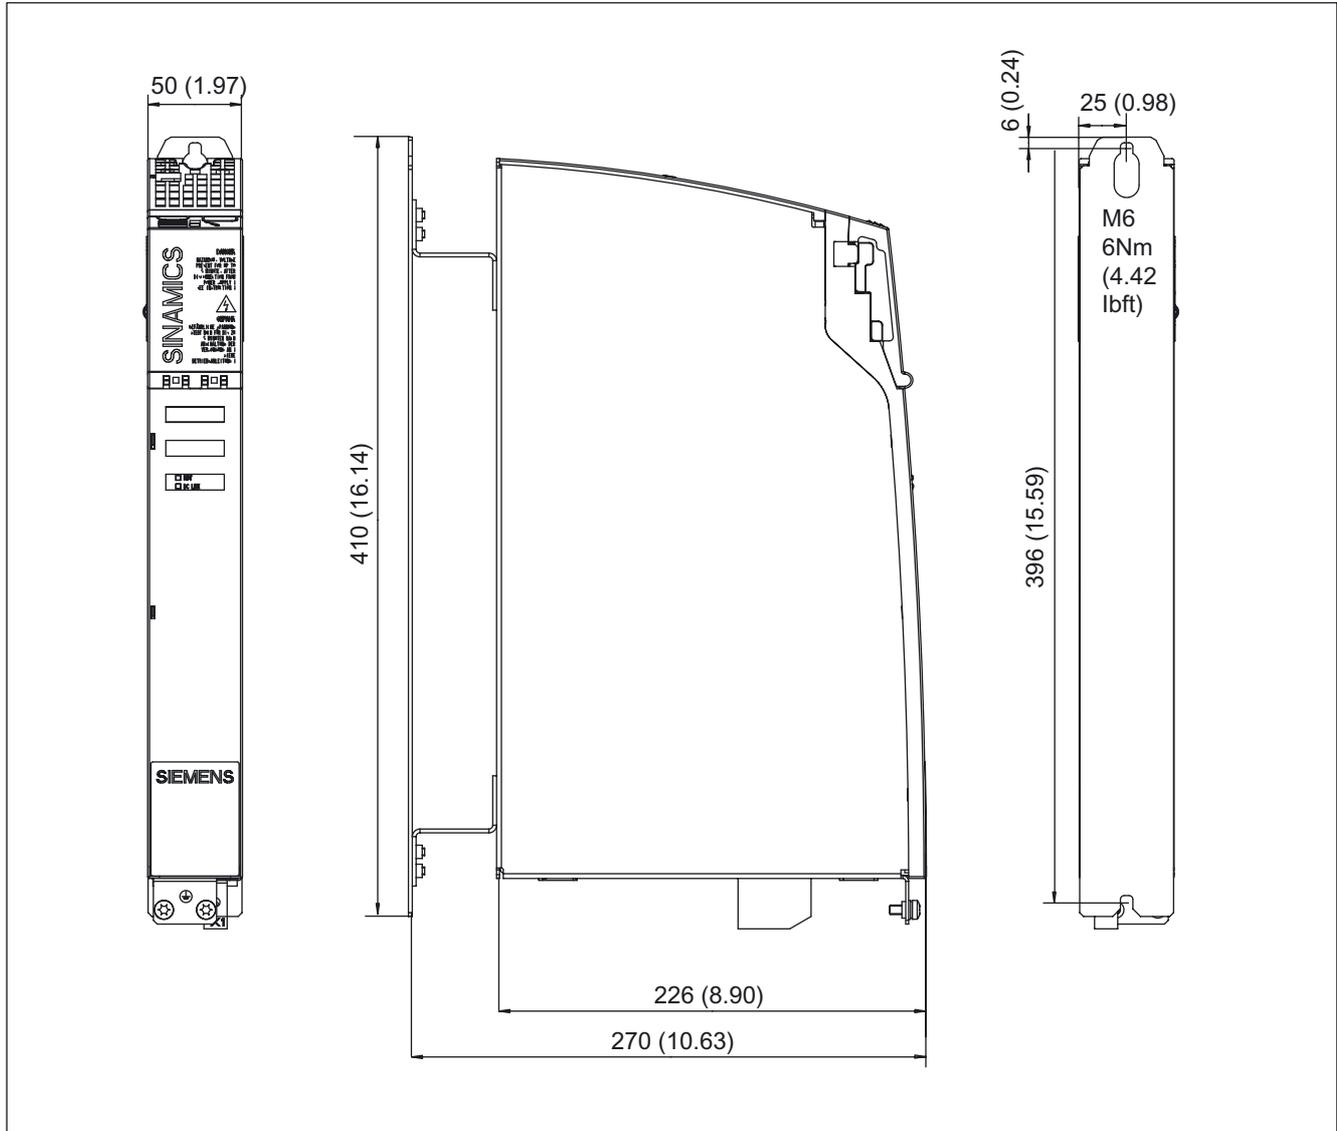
Dimension drawing of Voltage Clamping Module, all dimensions in mm and (inches)
